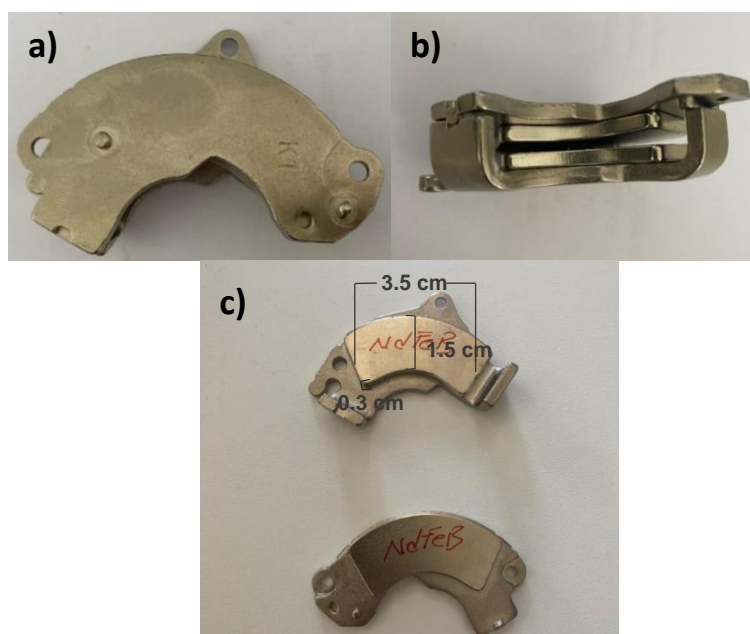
a) VCM assembly b) NdFeB magnets in VCM assembly c) NdFeB magnets after separation of VCM assembly.
